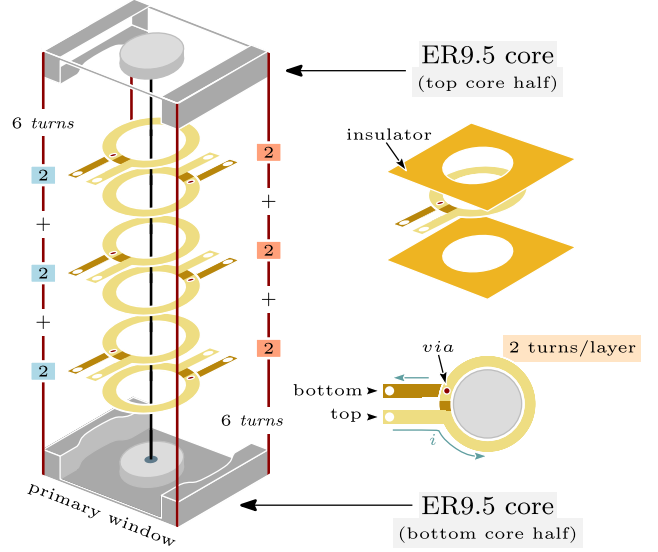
Exploded view of the planar transformer based on two ER9.5 half-cores and three two-turns layers per winding ( $n_1 = n_2 = 6$ ).
